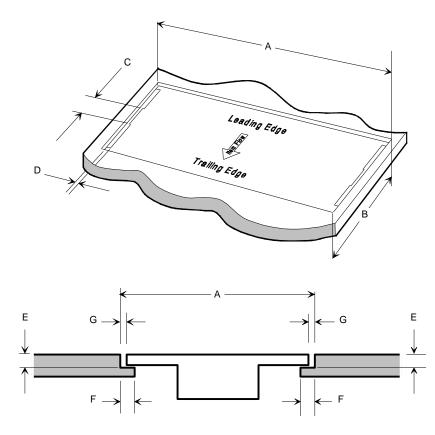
Checkstand Hole -7880 Scale Flat Mount
